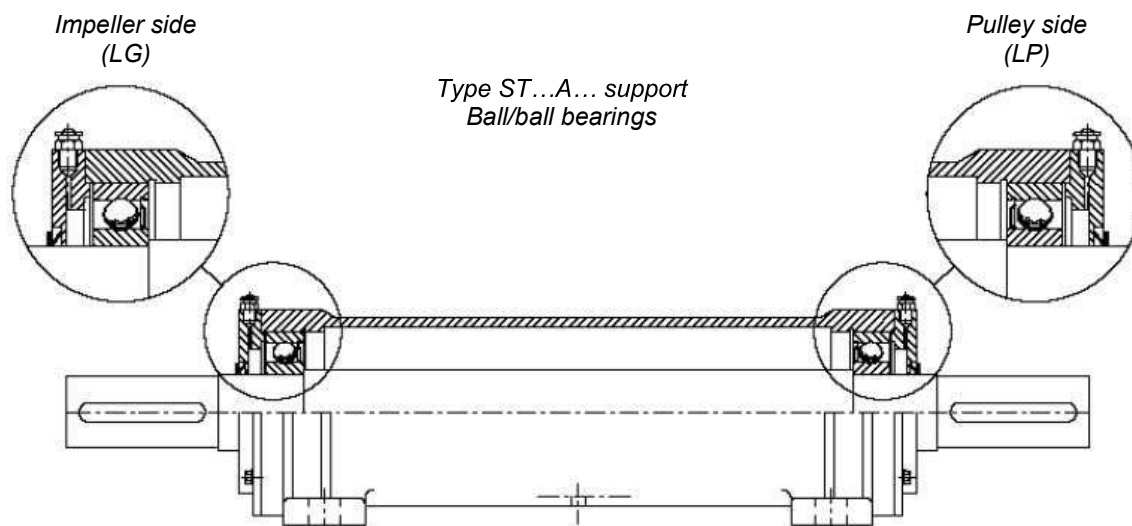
ST...A... one-piece support with radial ball bearings both on impeller side and transmission side
